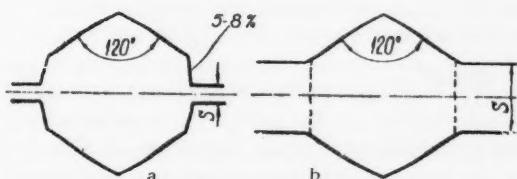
Finishing pass for rolling hexagonal steel section: a - usual design; b - new design.
